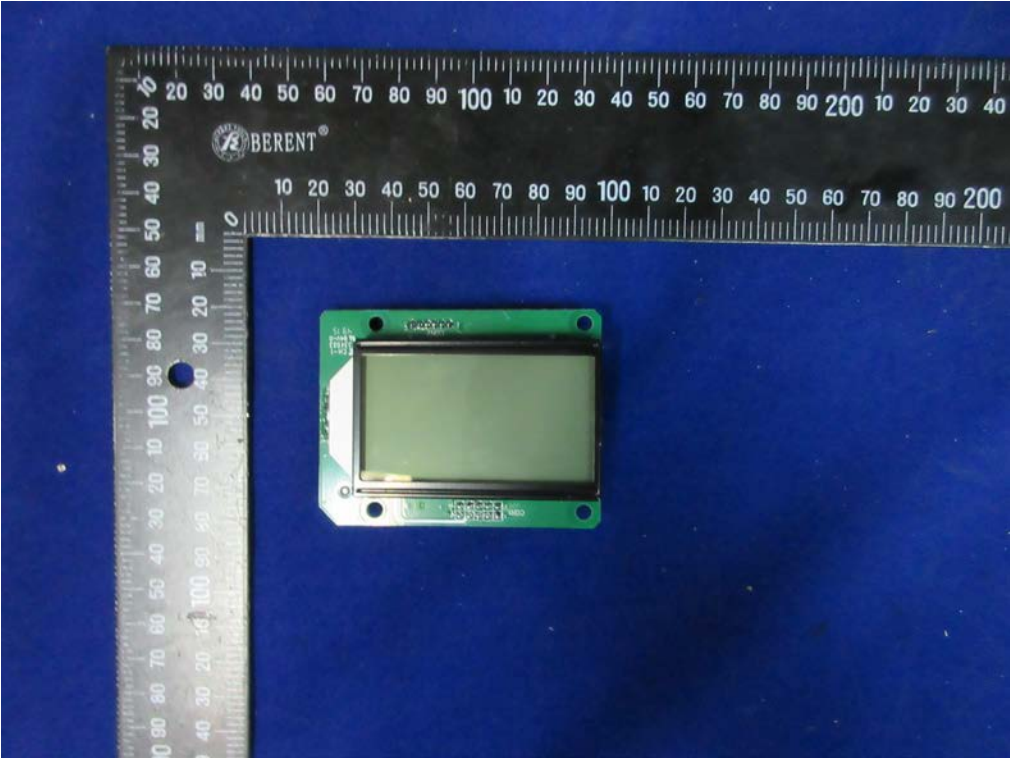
FlinInfini Lite 5kW-48V PCB of LCD display board components view
